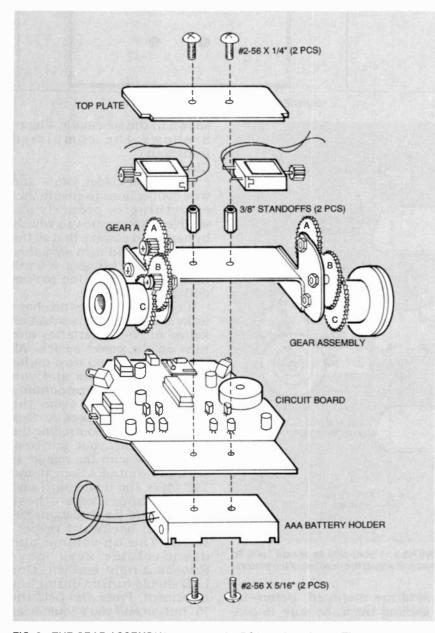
THE GEAR ASSEMBLY mounts to the PC board as shown. The two screws on the top plate hold the two motors in place.
